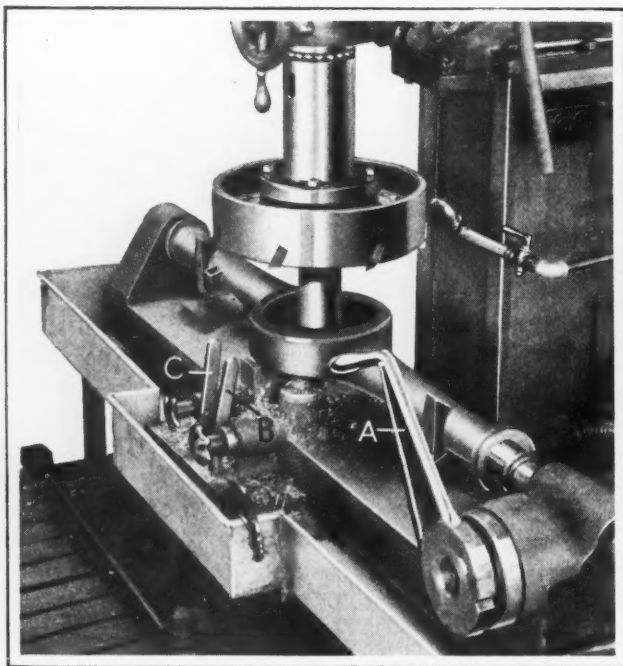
Facing the Banjo Flanges on an Upright Drilling Machine
